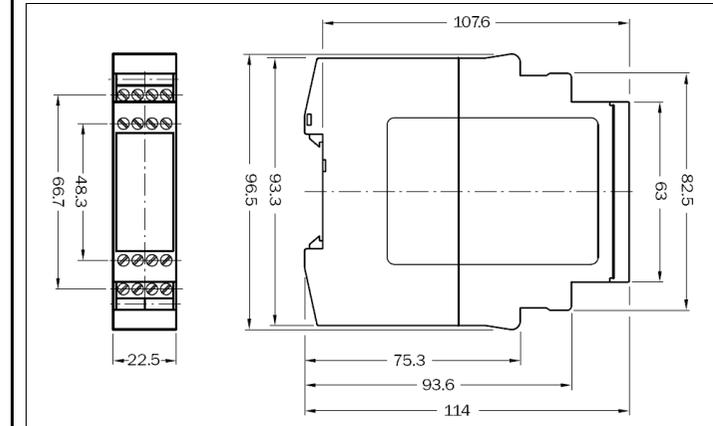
Dimensional drawing UE10-30S with screw type terminals (mm)
